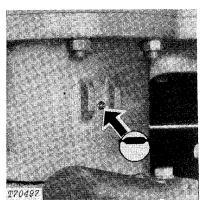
Left Feed Roll Final Drive Main Housing Pivot (1 Point)
